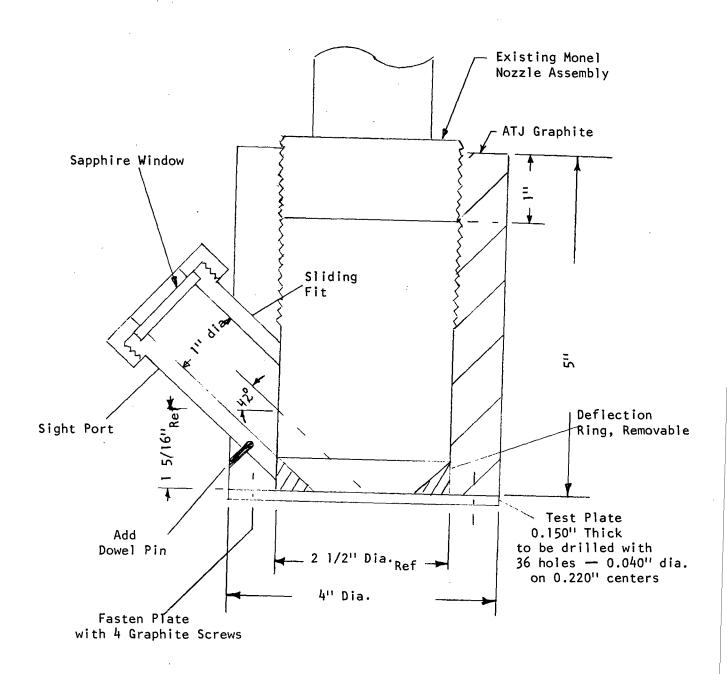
MATERIAL TEST CHAMBER ASSEMBLY.
